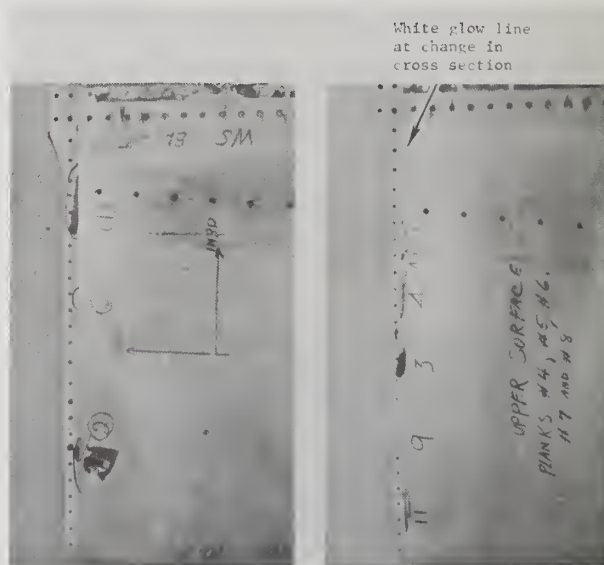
Photographs of the two center splice joints showing stress corrosion cracks located by a dye penetrant inspection.
